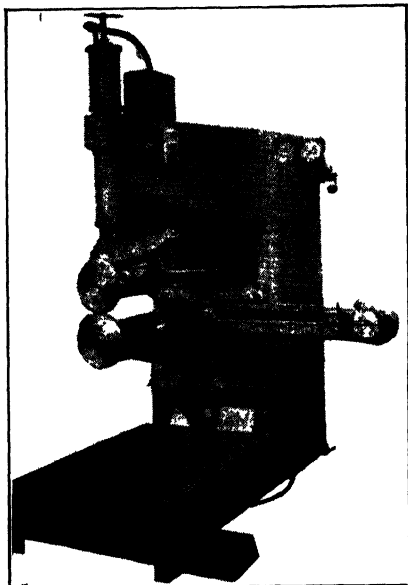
Special seam-welding machine for both circular and longitudinal seam welding. (Courtesy General Electric Company.)
